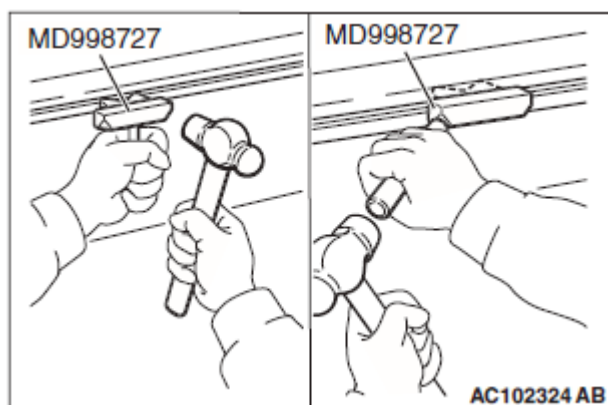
Tapping Engine Oil Pan Seal Surface Using Special Tool MD998727
